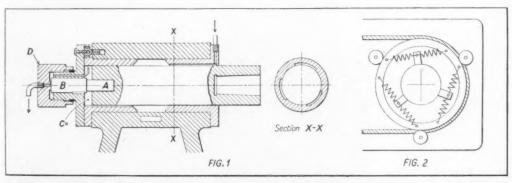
Sectional View of a Lathe Headstock Spindle Designed by Philips Research Laboratories, Eindhoven, for Precision Facing Operations. Reduced Air Pressure in the Compartment C Causes the Spindle End to be Held in Contact with the Thrust Block B. Fig. 2. The Pulley for Driving the Spindle on the Precision-facing Lathe is Supported on Three Rollers, and the Drive is Transmitted Through Steel Springs
